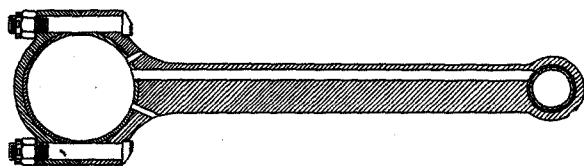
Oil is forced to the piston pins under pressure through the oil hole in the connecting rod.
